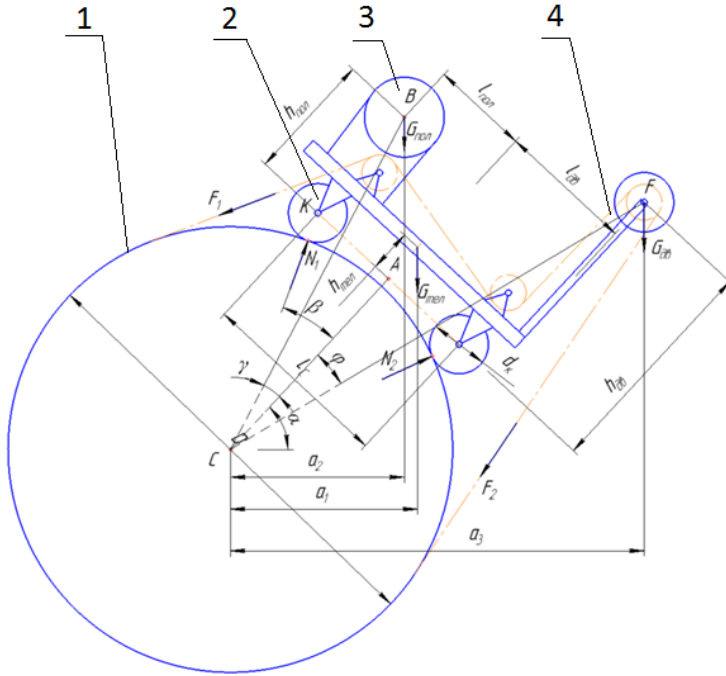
Calculation scheme of the arrangement of the movement mechanism of the scanner of pipe seams: 1 - the object of testing (pipe with an annular welded seam), 2 - the platform with support wheels and the scanner drive, 3 - workload (scanner), 4 - flexible joint.
